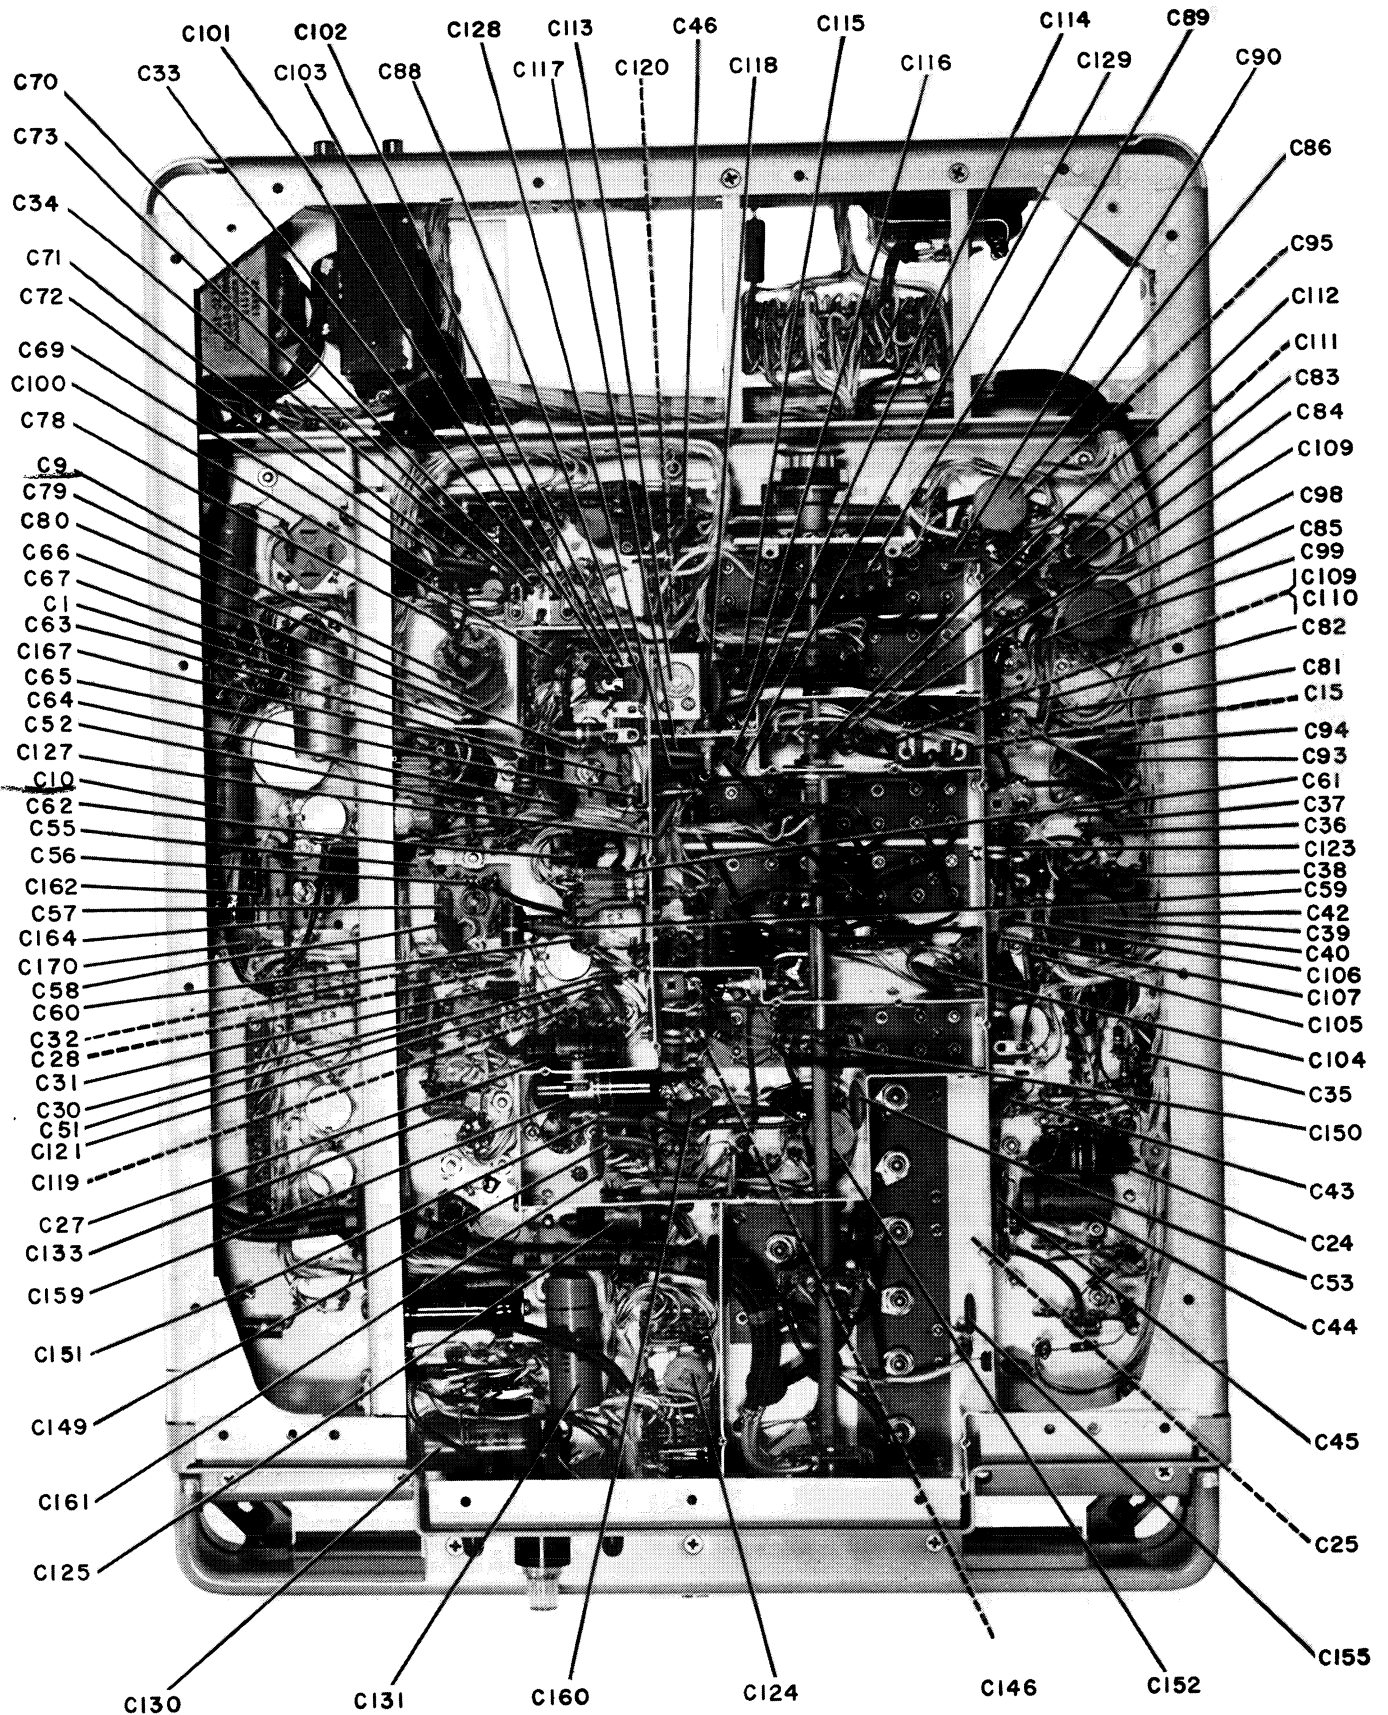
32MS-1A, Bottom View (B), Cover and Shield Removed, Keyed
